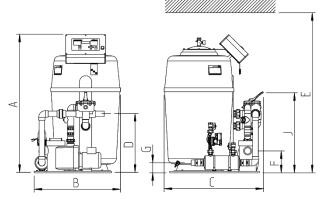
Dimensional drawing of filter system GENO-mat F 600 HK; RC
